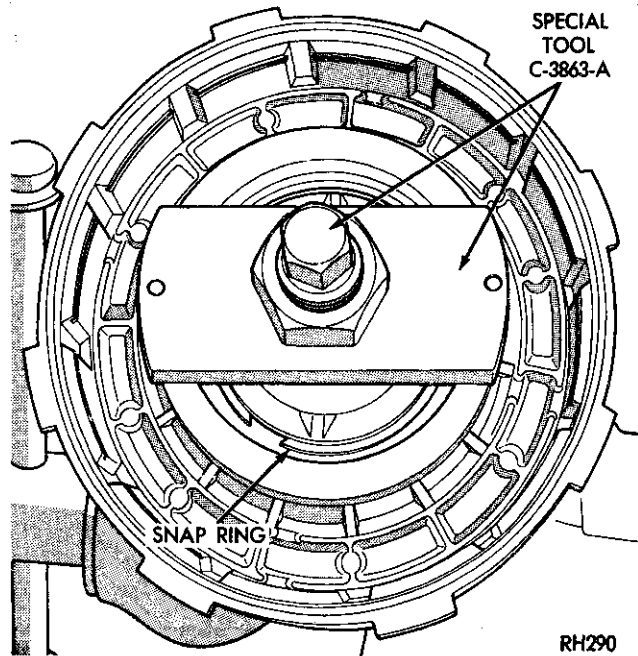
Removing Front Clutch Spring Retainer Snap Ring
